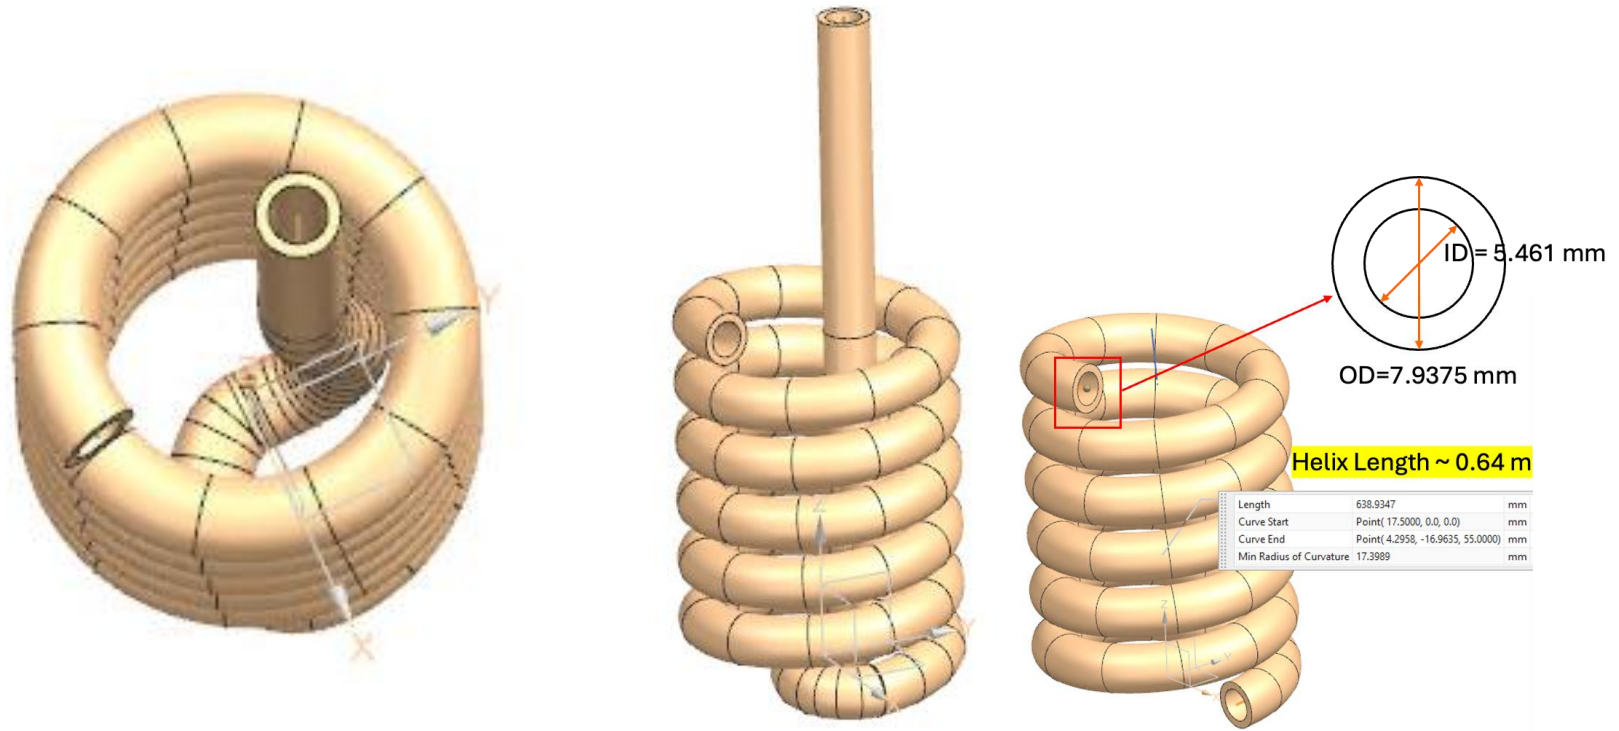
Helical coil drawing. Top view (left), front view (middle), and the cross section of the coil (right) of the helix. The helix information is following: ID_{coil} = 5.461 mm (0.215"), OD_{coil} = 7.9375 mm (5/16"), Diameter of helix = 35 mm, Pitch = 9.5 mm, Height of helix = 55 mm (~ 5.7 turns). The straight pipes are attached and brazed. Helix is created by mandril fabricated by 3D printing. The fabrication is done in University of Illinois Urbana-Champaign Aerospace Engineering Machine-Shop.
